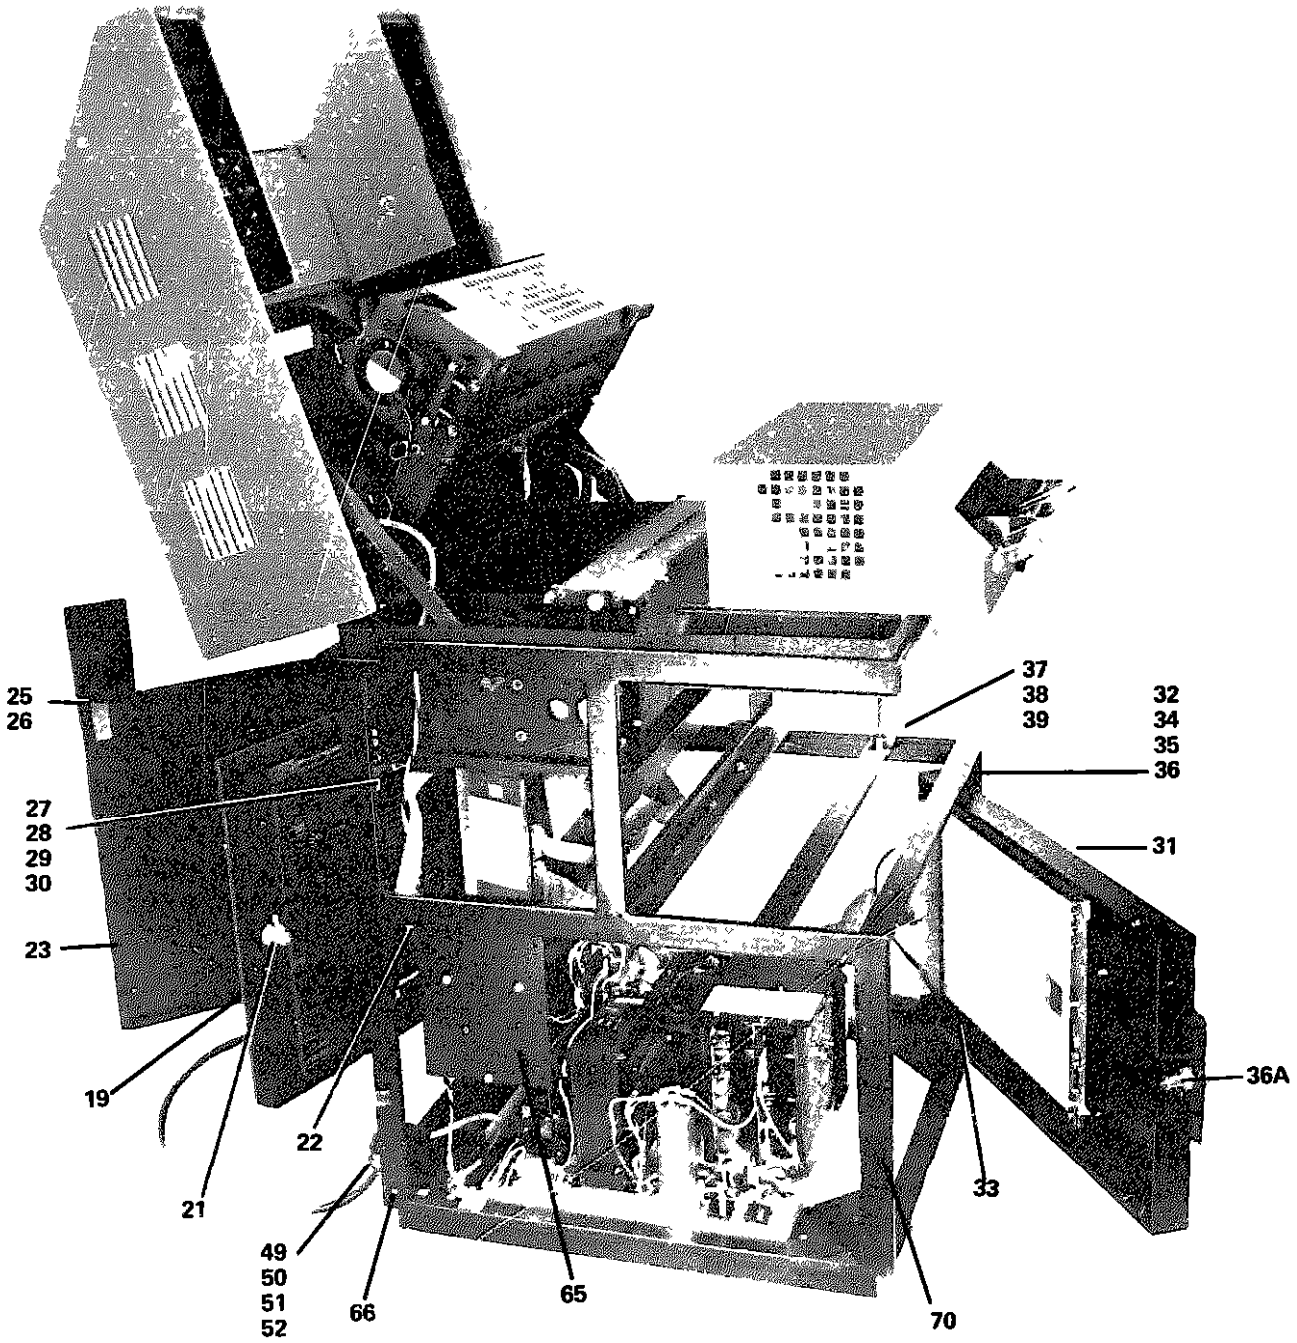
Cabinet Assembly 1A1 (Sheet 3 of 4)
